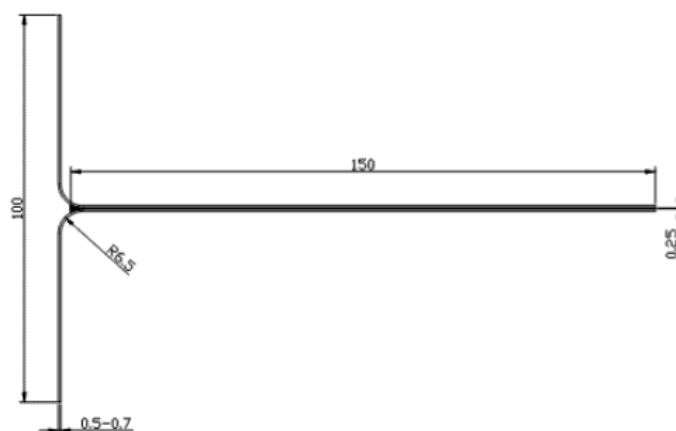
Schematic representation of a typical T-peel joint geometry (all dimensions in mm)
